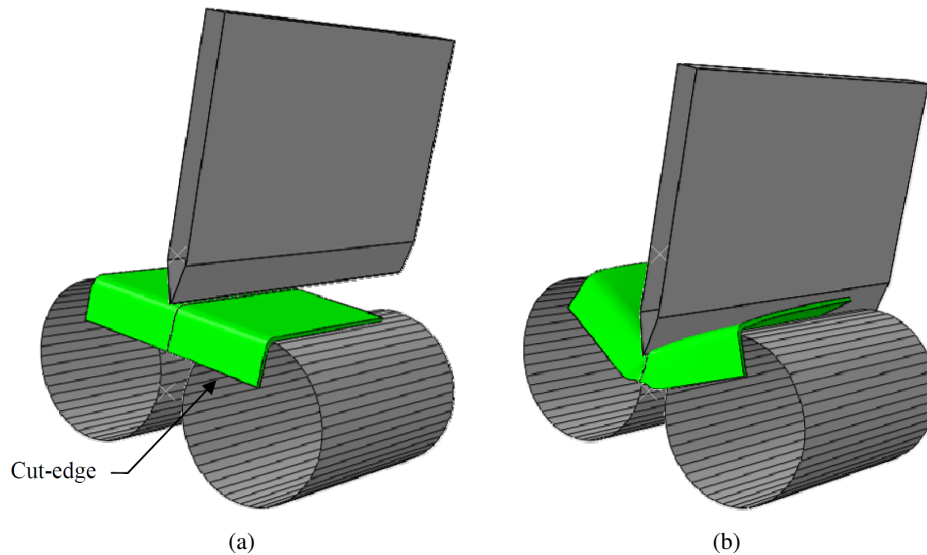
Principle of double bending test: (a) sample to be tested containing a cut-edge, (b) the edge fracture after bending test [Bouaziz et al., 2010].
